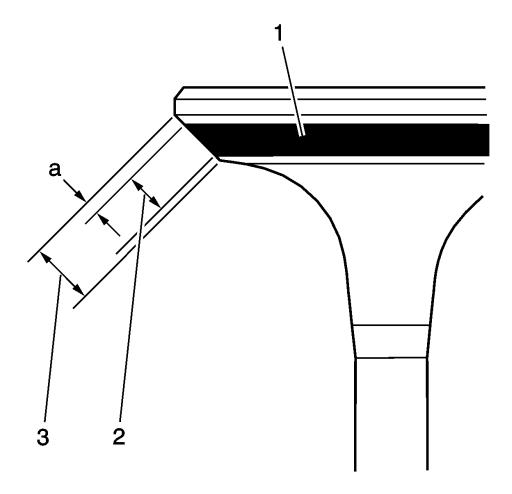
Inspecting Valve Face Courtesy of GENERAL MOTORS COMPANY
